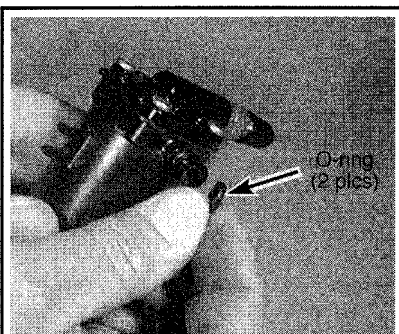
If equipped remove the O-rings from the valve inlet fitting
